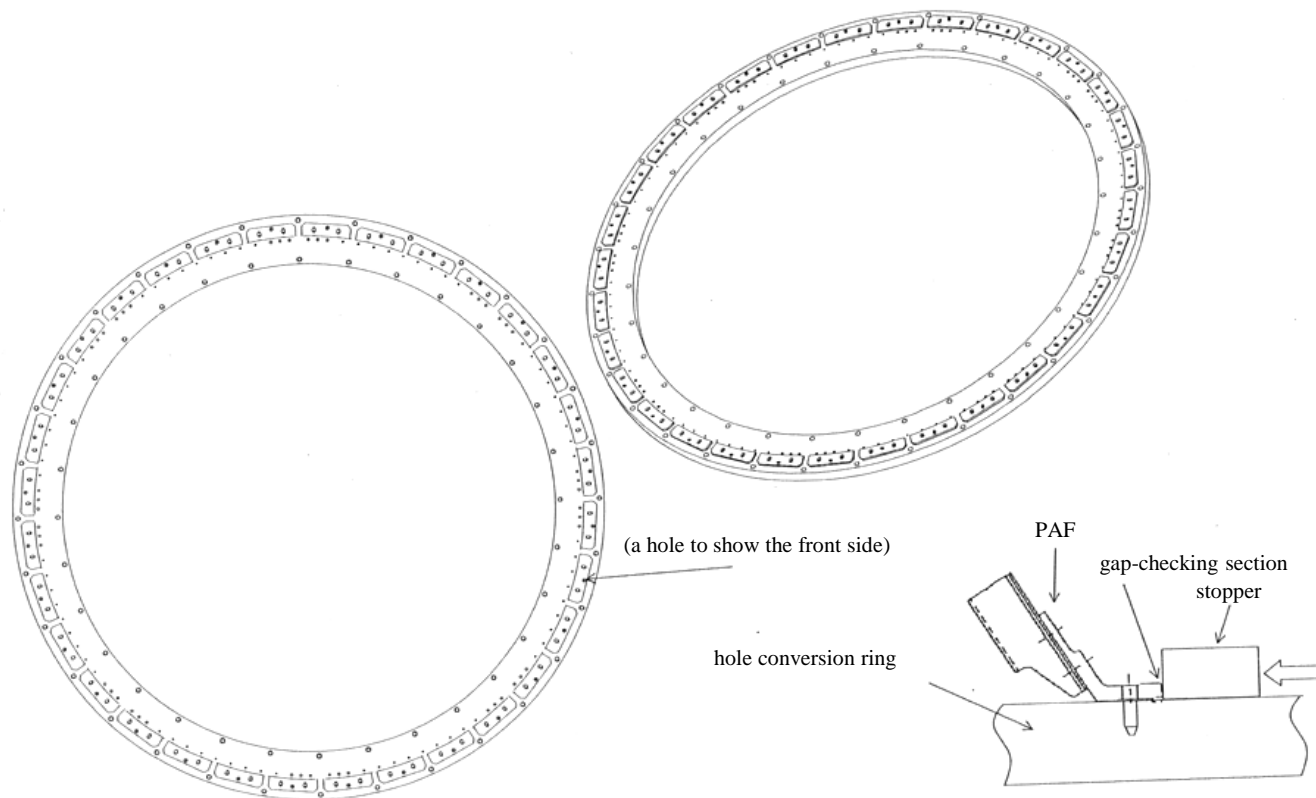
Assembly Drawing of Stopper on Screw Hole Conversion Ring for Horizontal Vibration Table
